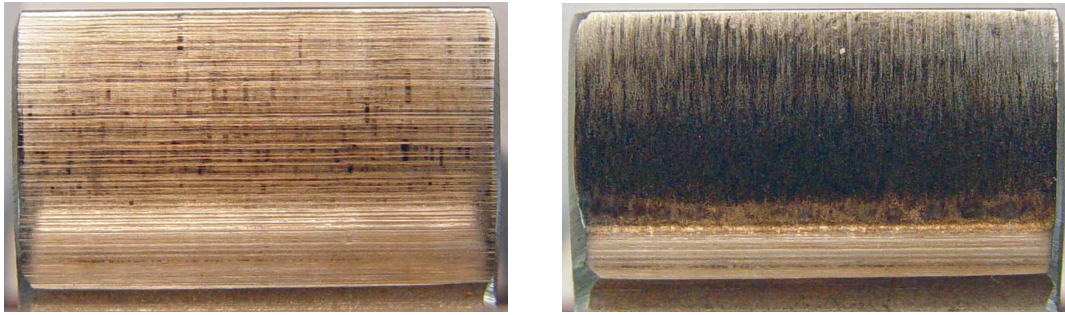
Gear teeth flanks after scuffing test: right undamaged flank, left scuffed flank (width =20mm).
